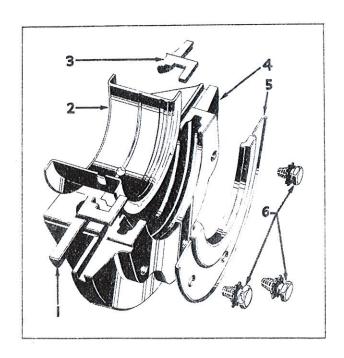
Crankshaft Rear Bearing Cap Oil Seals
